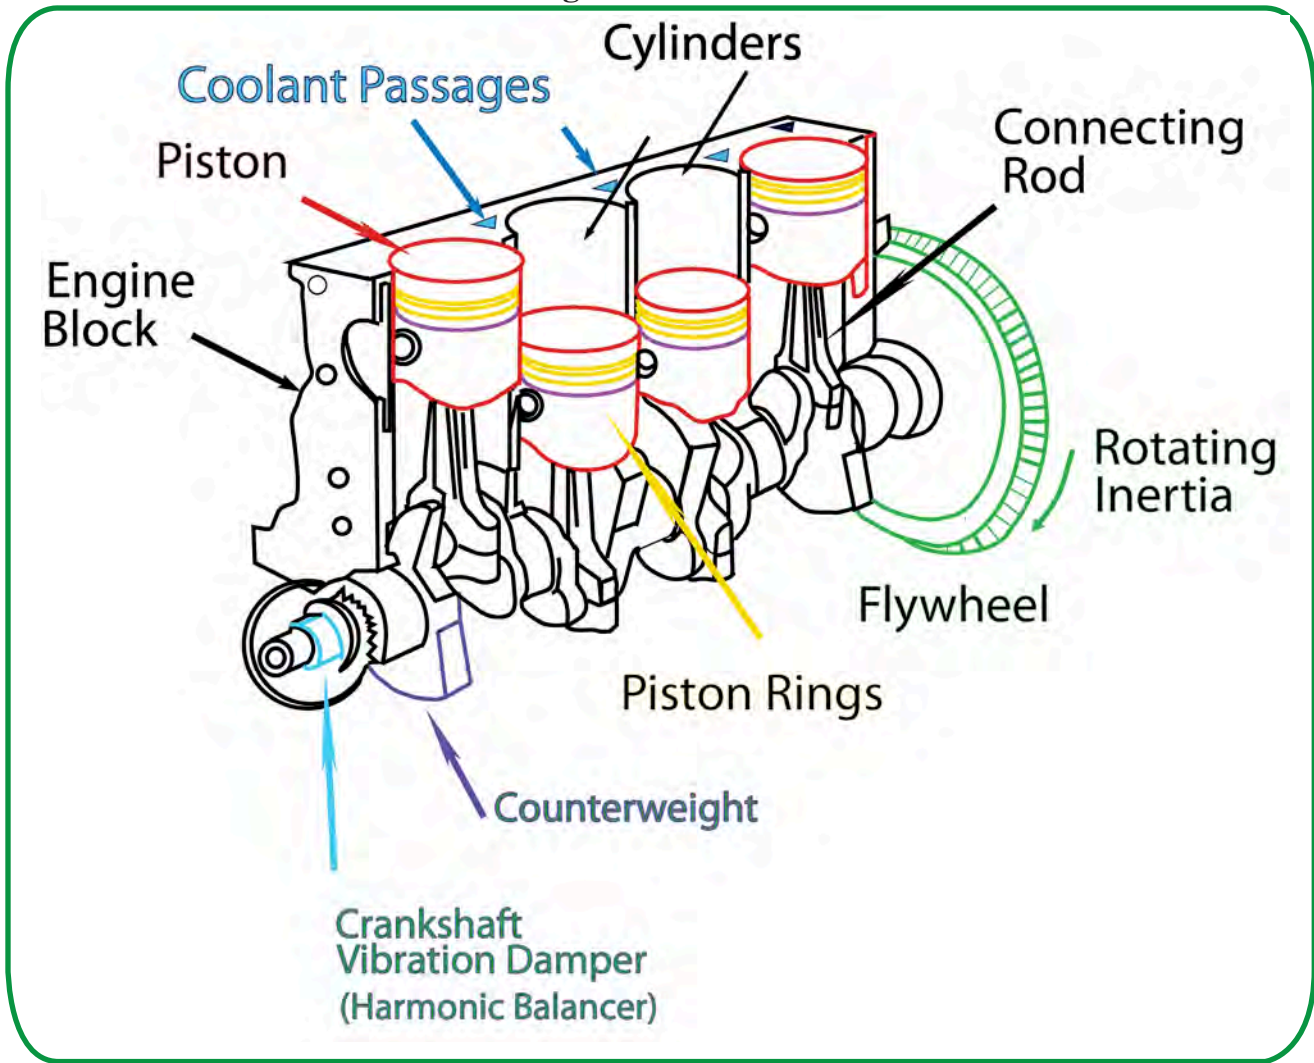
Pistons connected to a crankshaft. Pistons have compression and oil rings to seal them in the cylinder and prevent exhaust gasses from escaping into the crank case and oil from getting into the cylinders.
